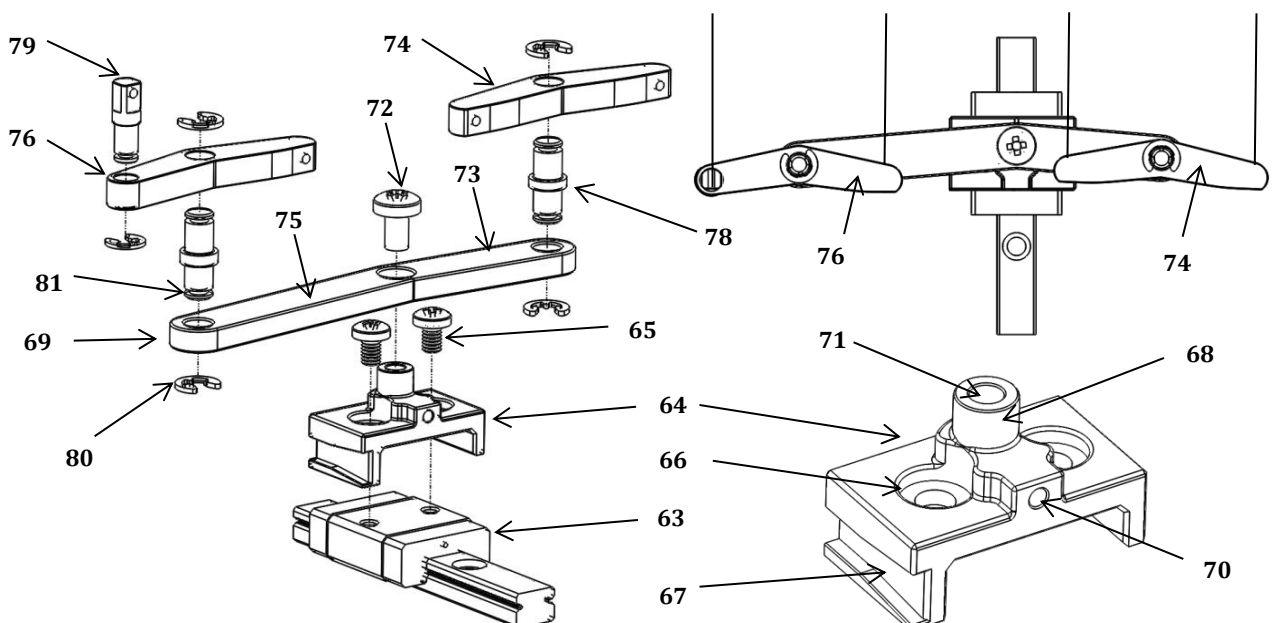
Exploded perspective and superior views of the differential seesaw mechanism with supero-lateral perspective view of the slider carriage unit.
